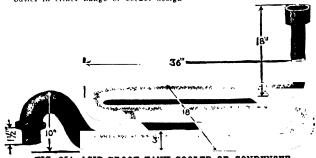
, ACID PROOF TANK COOLER OR CONDENSER
